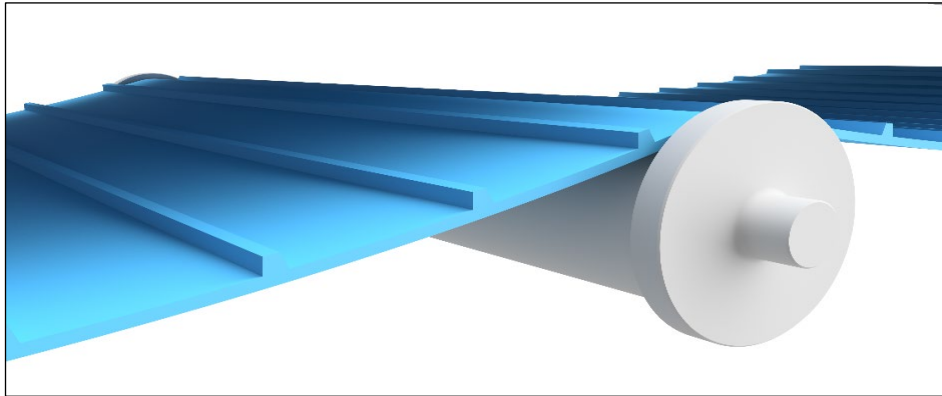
FLANGED ROLLER ON FULL LUG
